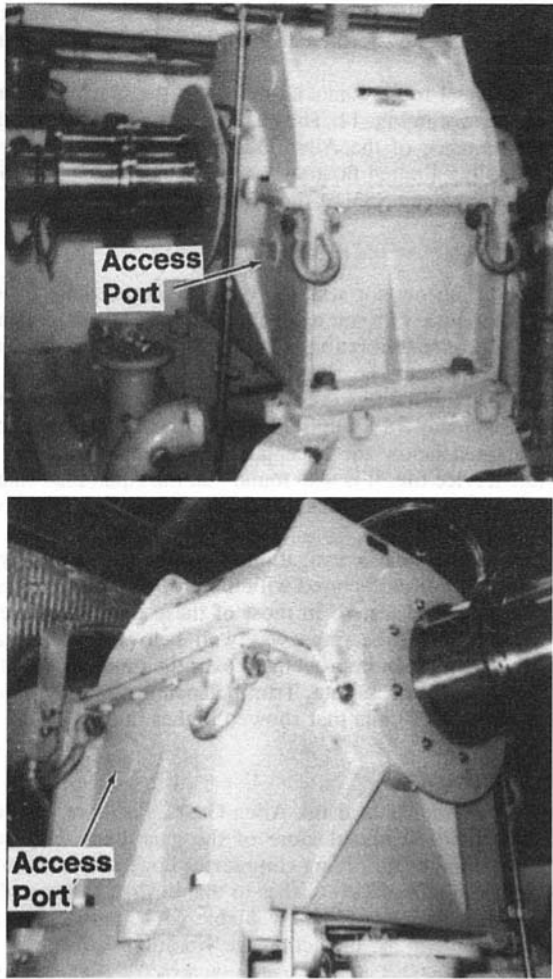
Pictorial view of the gearbox housing modification with access ports for trim balancing
